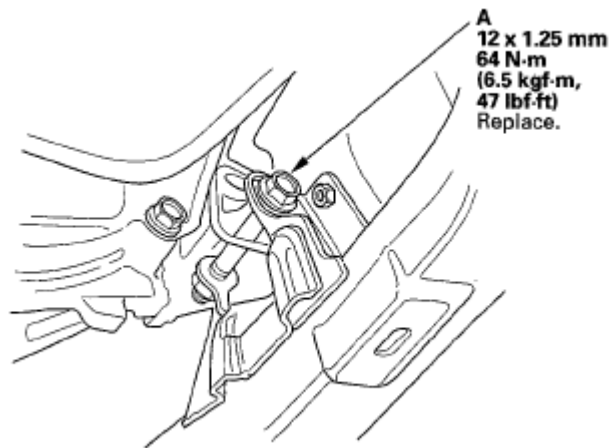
Identifying Engine Mount Bracket Mounting Bolt With Torque Specification
